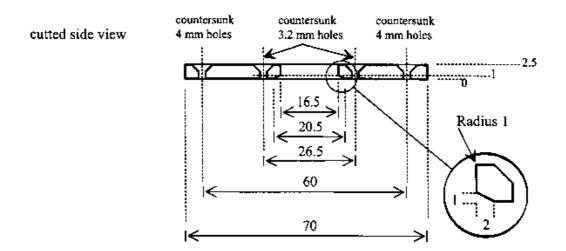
Mechanical drawing of a coaxial target, part 4/5
